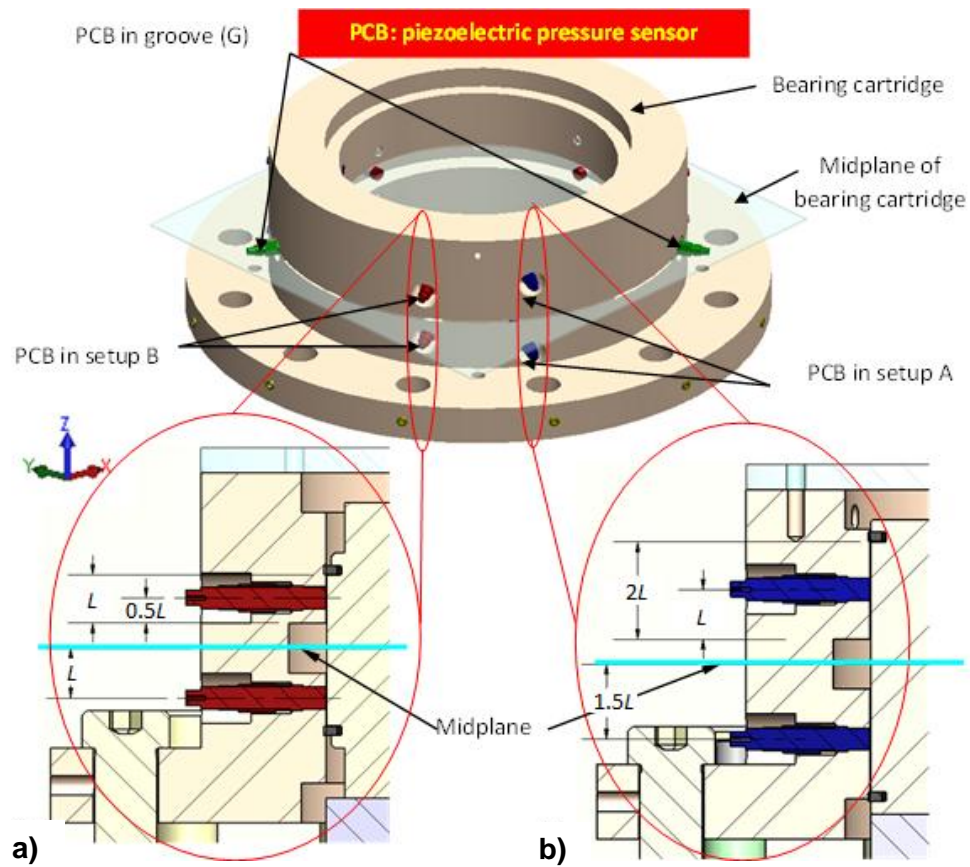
Disposition of pressure sensors in bearing cartridge. Cutaway views of bearing housing with pressure sensors placement for (a) short length damper: land lengths L , and (b) long damper: land lengths $2L$ [35]
